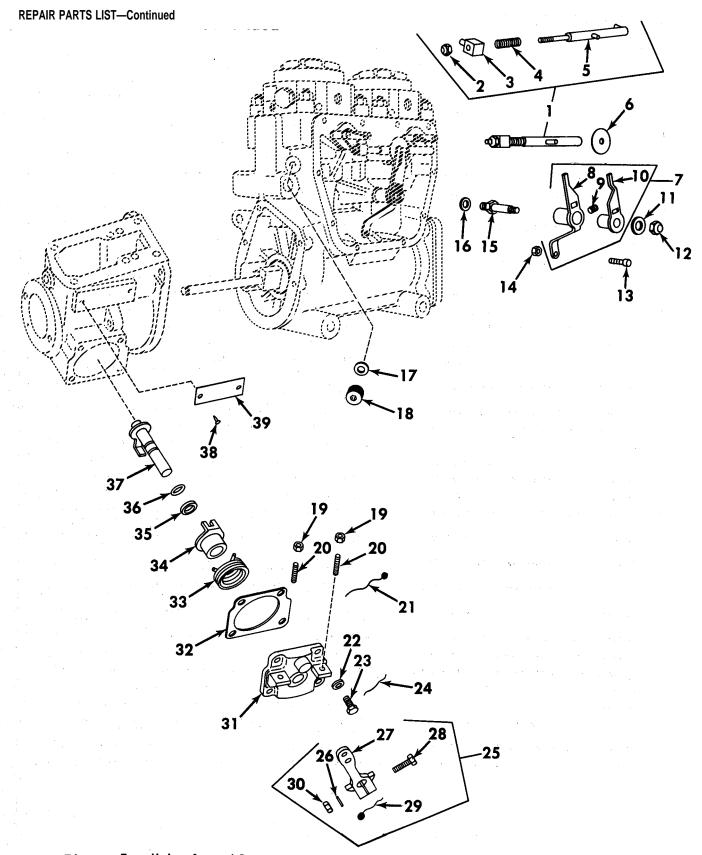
Yoke Assembly, Lever Assembly, Operating Lever Assembly, and Associated Parts.
